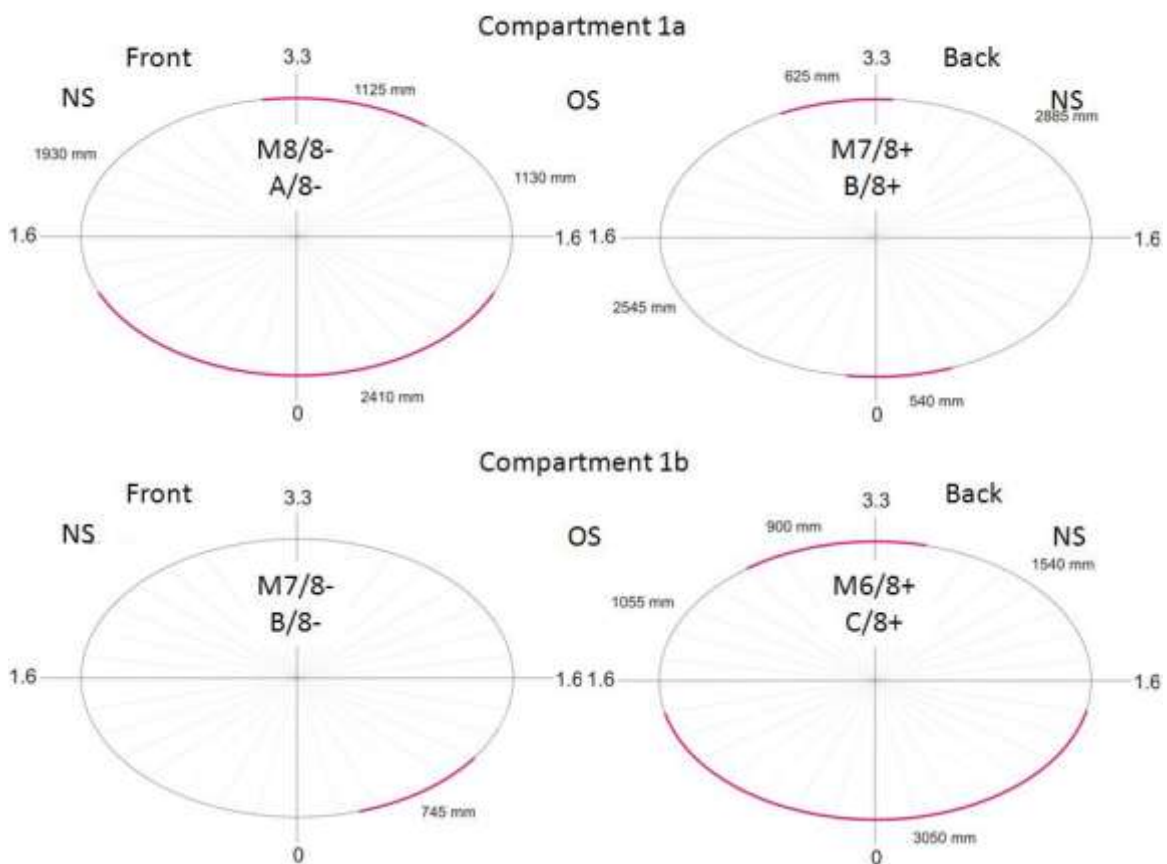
Fillet weld locations for compartment 1 of GRW tanker J2580
